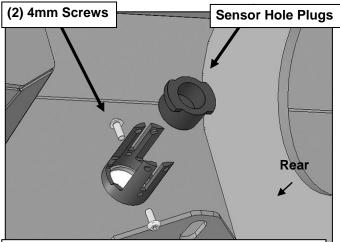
Remove sensors and wiring harness. Rear Cross Traffic Alert (RCTA) and parking sensors pictured
